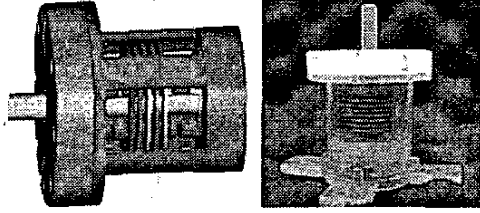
Assembled Multiple Flat-Plate ERF Actuator: CAD Drawing (Left) & Prototype (Right)
